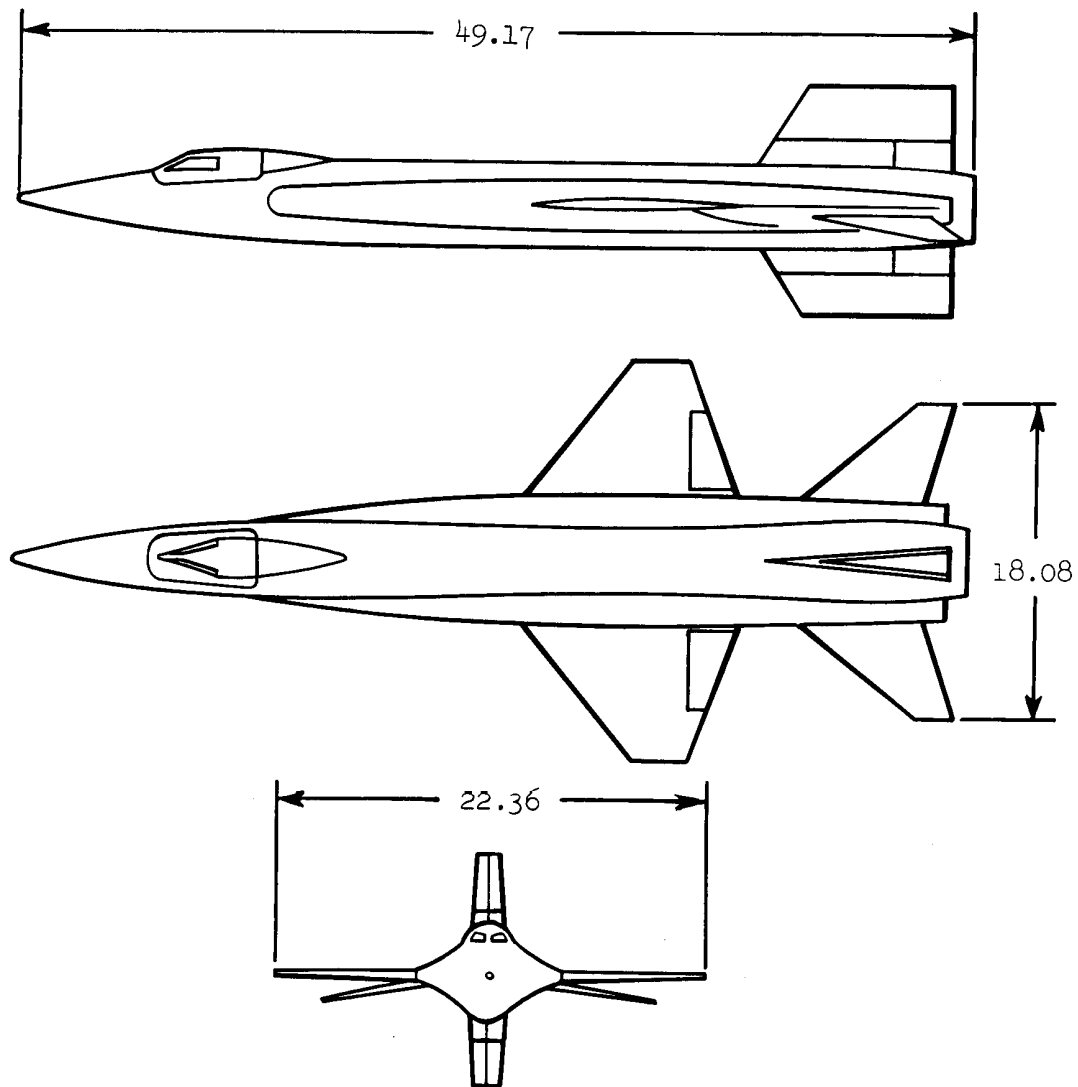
Three-view drawing of the X-15 with ball nose. All dimensions in feet.
